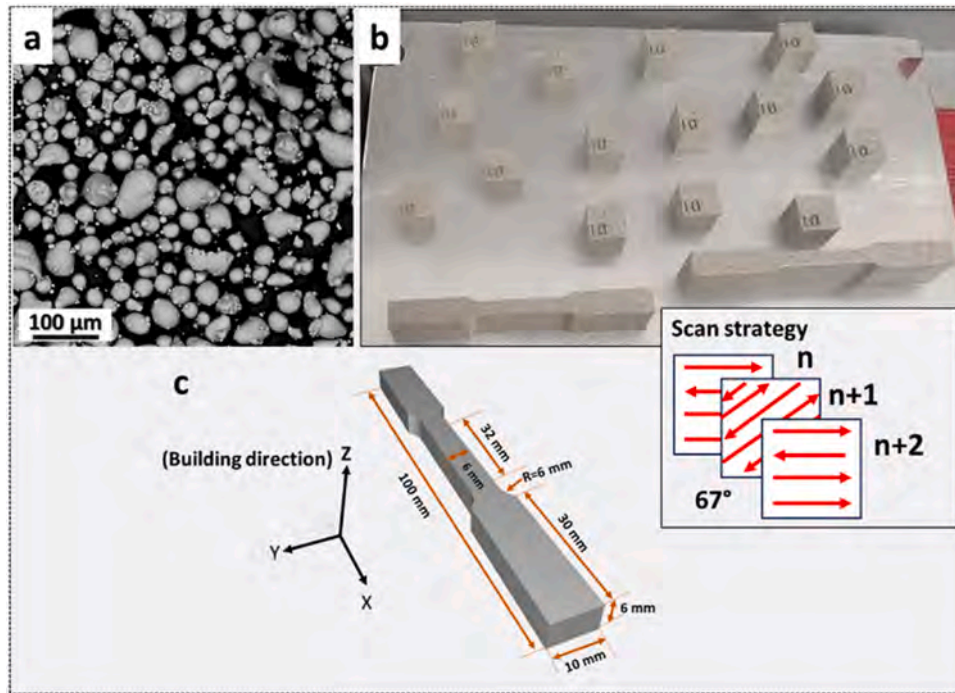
(a) SEM micrograph of the A20X powder, (b) built platform with printed parts and (c) a schematic of tensile specimen with ASTM E8 dimensions.
